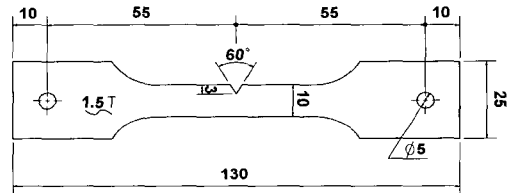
Dimension of single edge notched test specimen (unit : mm).
